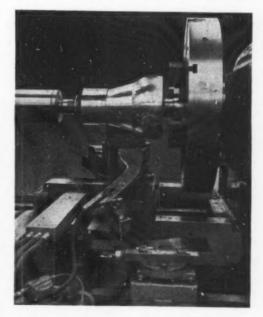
Set-up for turning a rocket nozzle accurately to the required contour on an engine lattle with an air-gauge tracer
